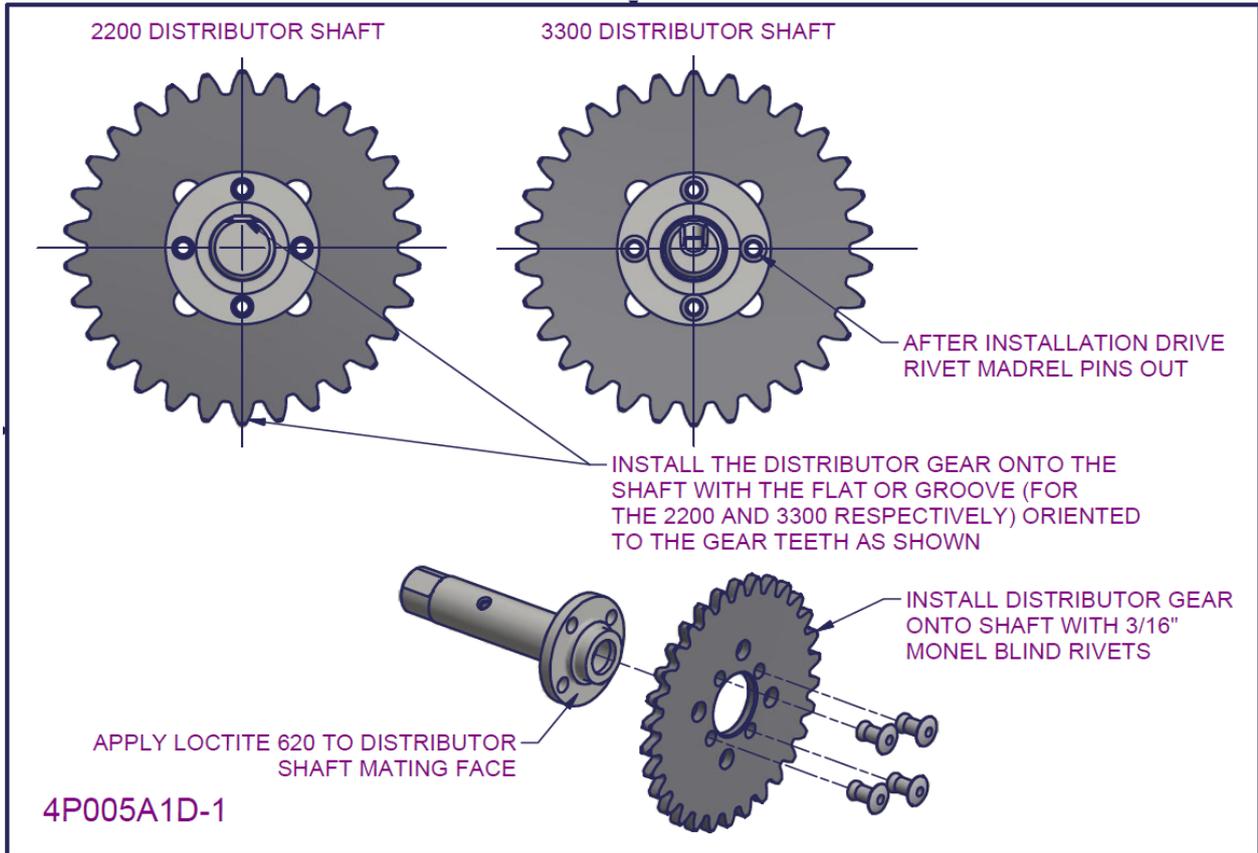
2200/3300 Distributor gearbox subassembly 4
